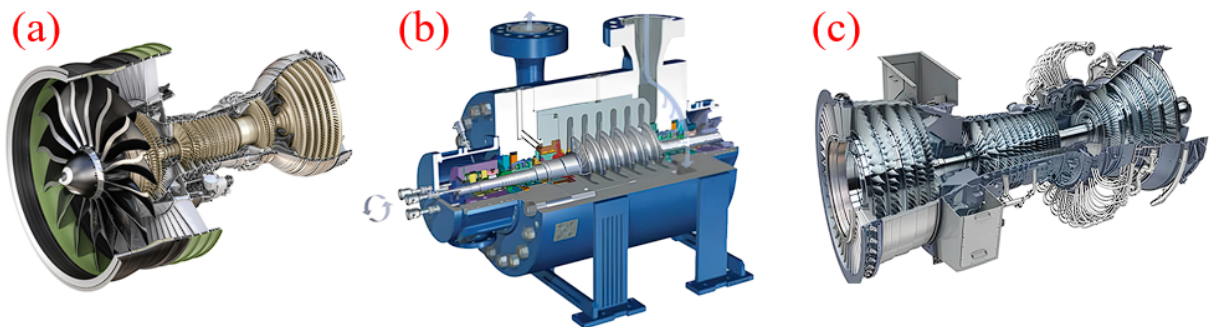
Example of rotating machines (a) Turbojet [3], (b) Centrifugal compressors [4], (c) Gas turbine [5].
